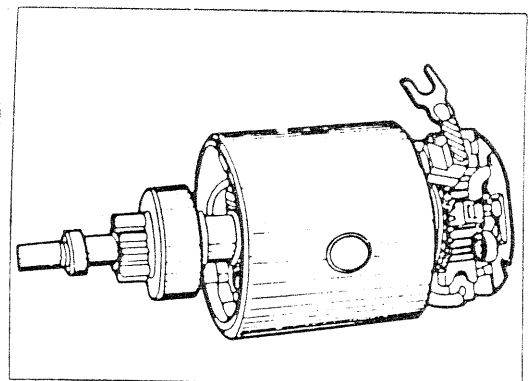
L. Assembling Armature, Yoke and Brush Holder
